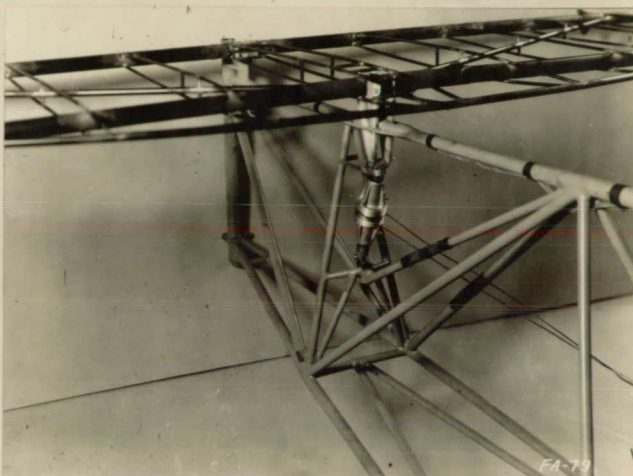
All of the tail surfaces, as well as the entire fuselage, are of extra heavy seamless steel tubing construction, acetylene welded, all joints reinforced. The rugged construction of the stabilizer adjustment unit is clearly shown in this view.
